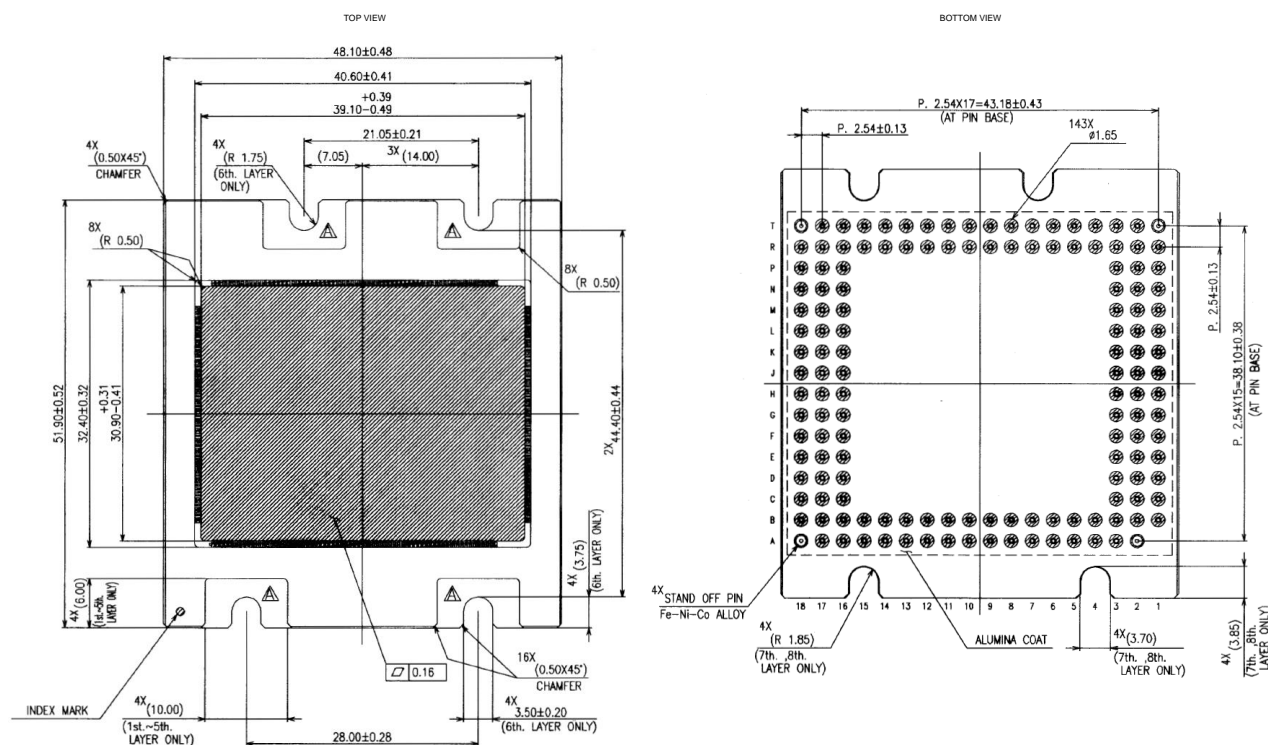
PACKAGE DRAWING OF THE CMV20000. ALL DISTANCES IN MM.
